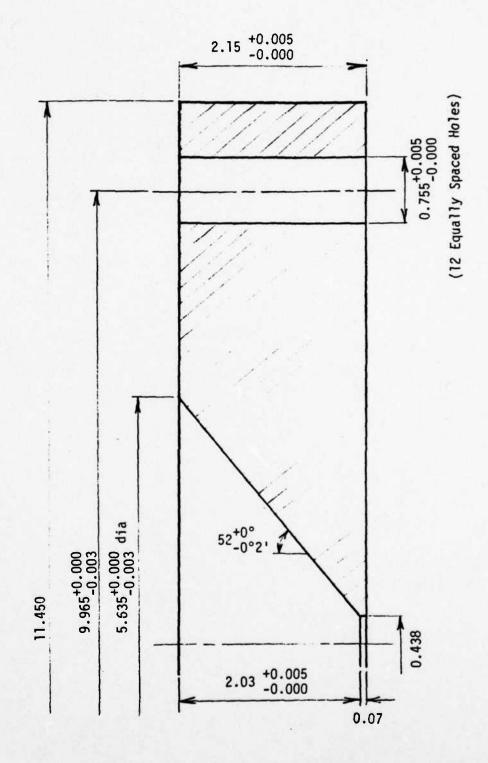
Detailed Working Drawing (Cross Section) of the Right Backing Jaw
